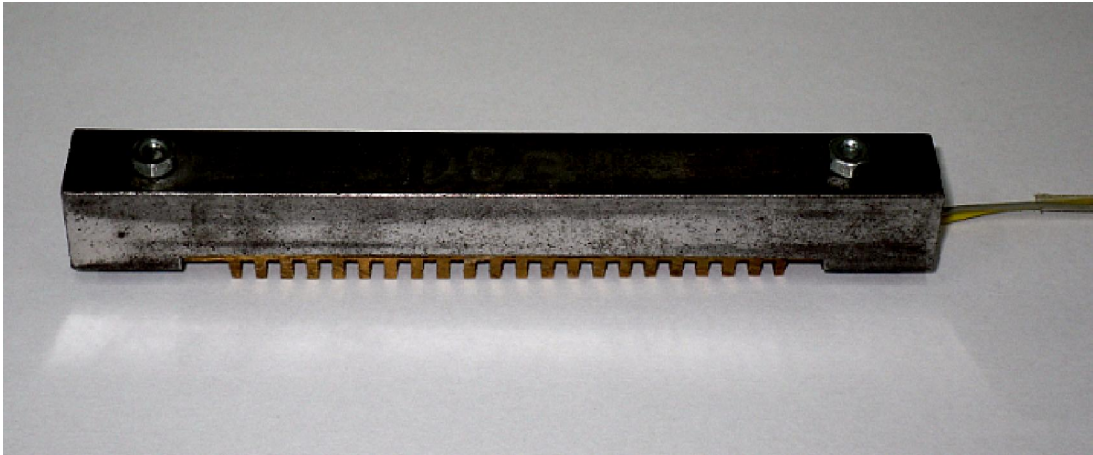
Assembly of the single actuator piezoelectric linear motor.
